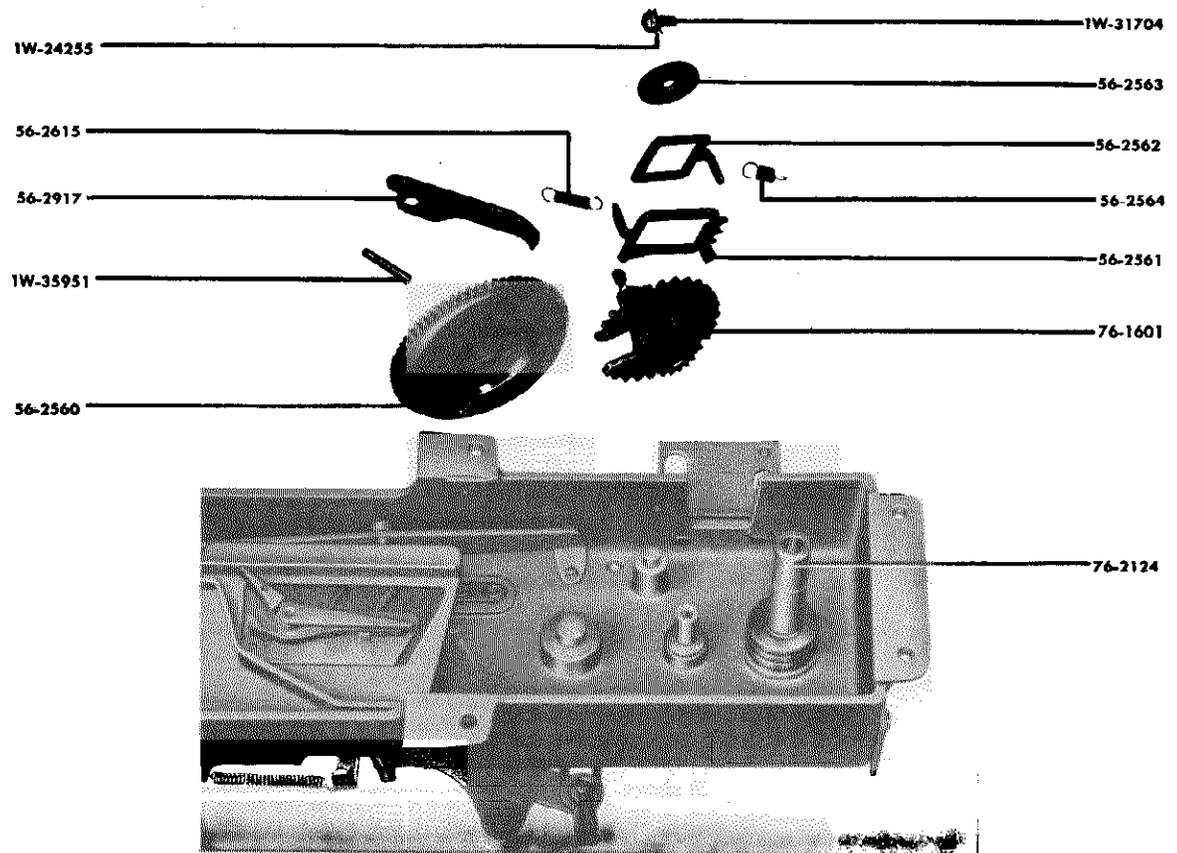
PARTS OF MAIN-GEAR AND INTERMEDIATE-GEAR ASSEMBLIES, UNDERSIDE VIEW.
